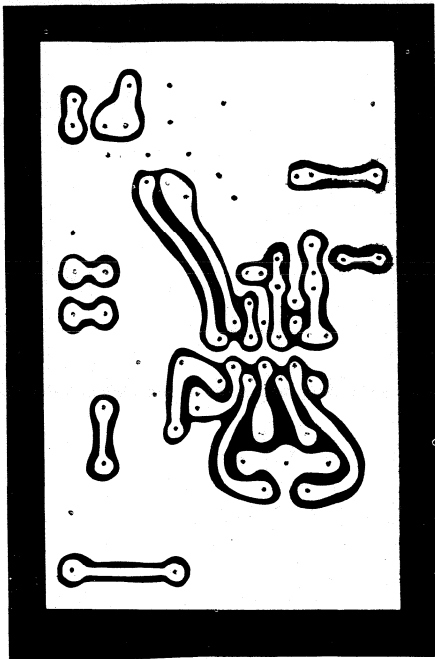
Recommended layout of printed-circuit board for TV-receiver sound strip utilizing RCA-CA3042. (Actual Size, Bottom View)
